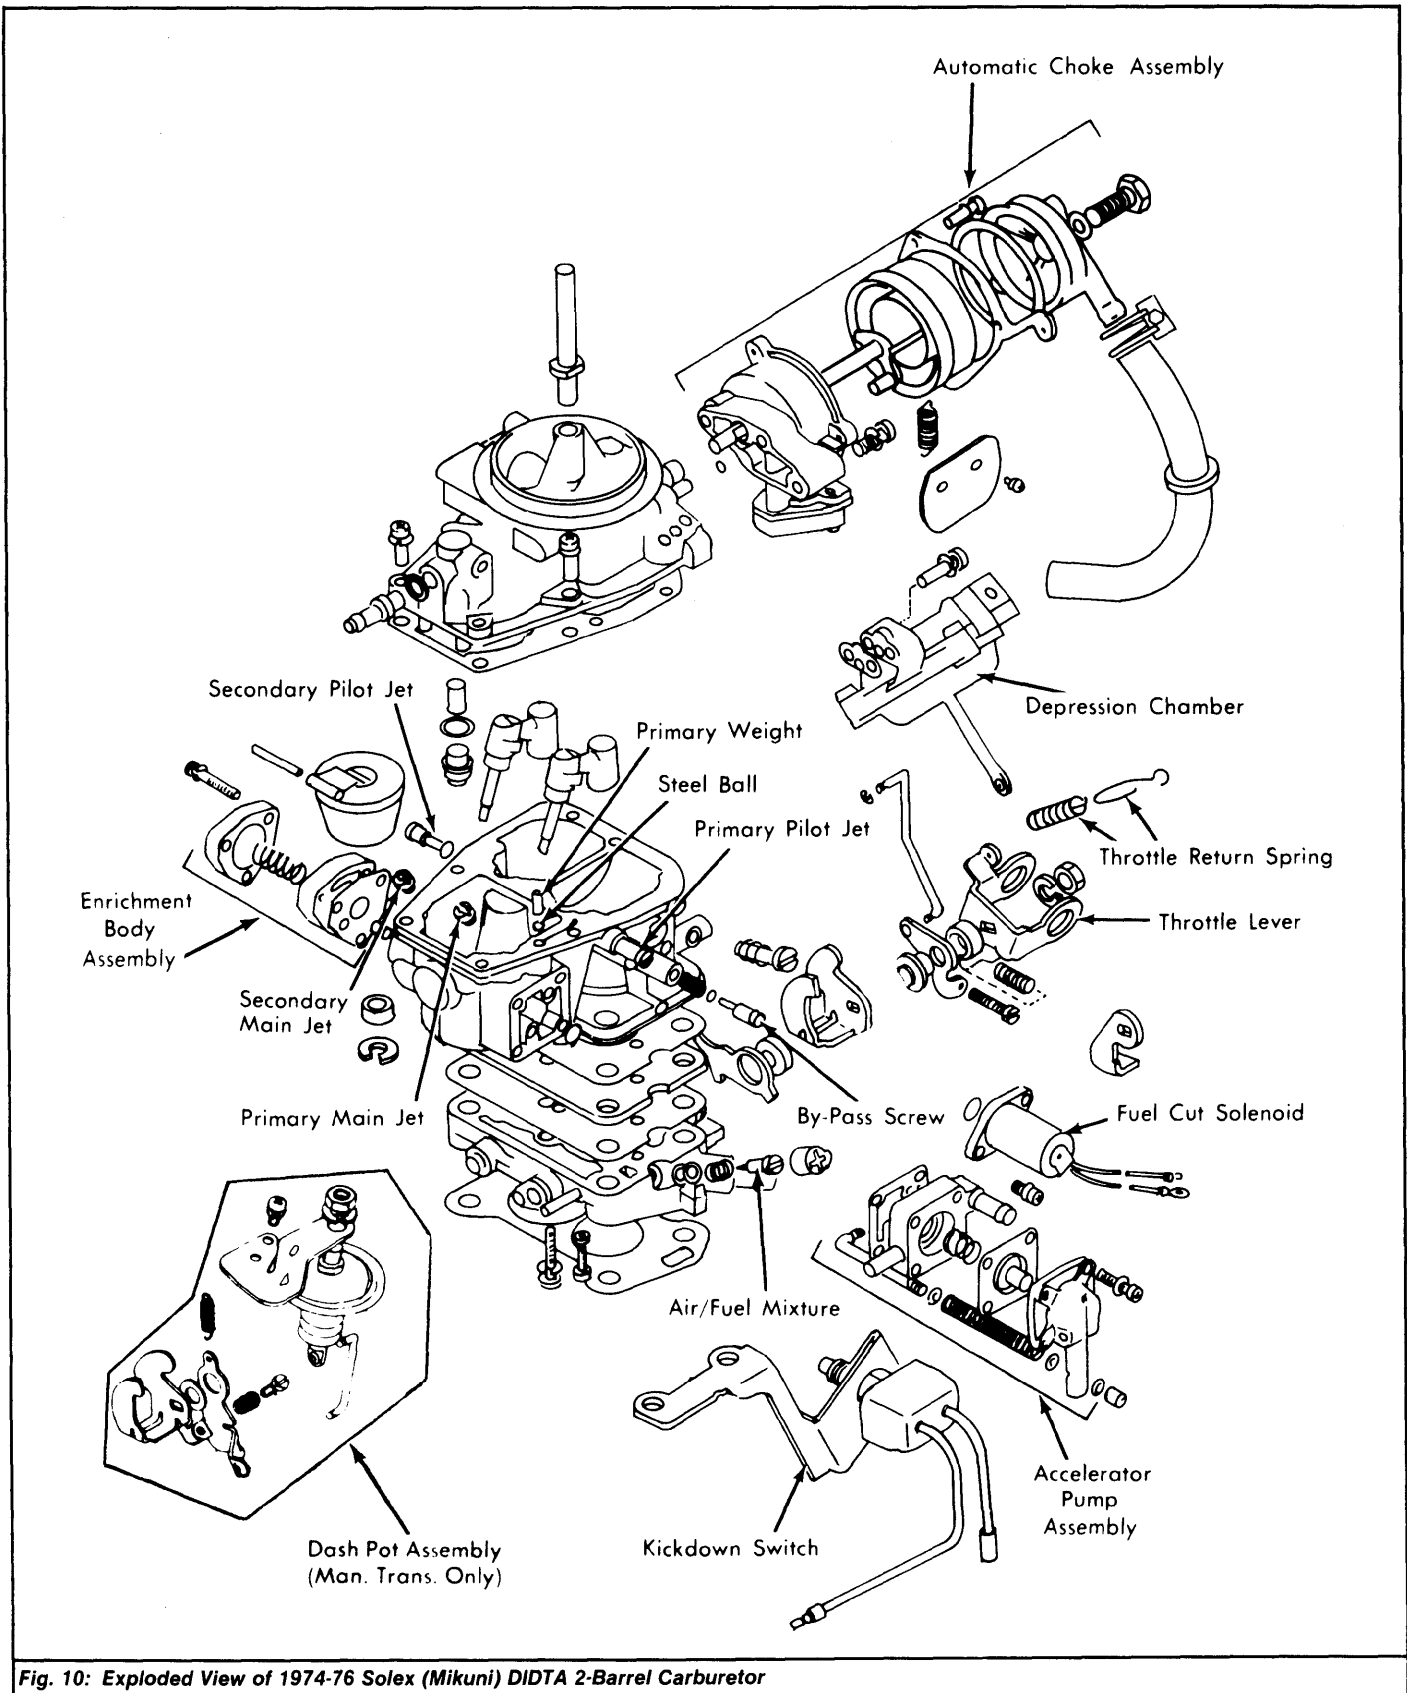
Exploded View of 1974-76 Solex (Mikuni) DIDTA 2-Barrel Carburetor
